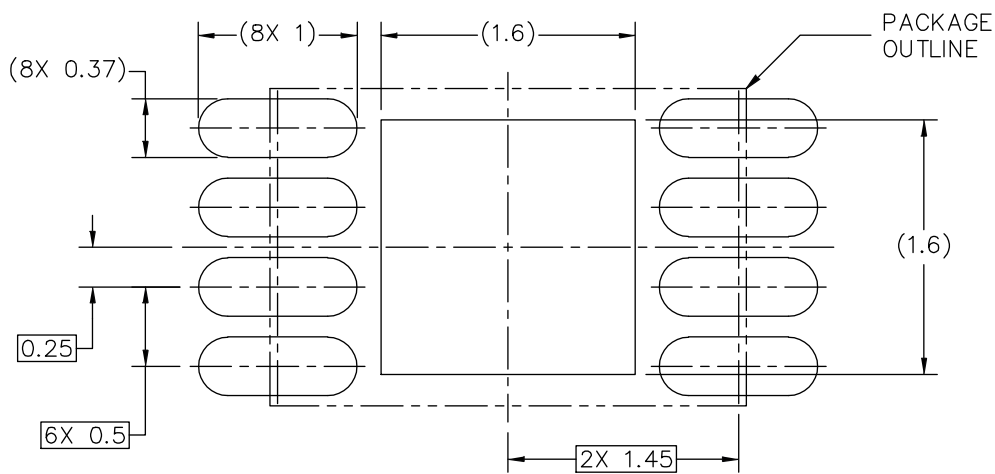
PCB footprint for SOT996-2 (XSON8U); reflow soldering
